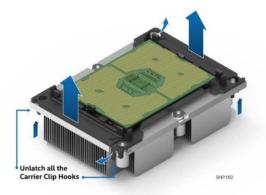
Releasing the Processor Carrier Clip from the Heat Sink
